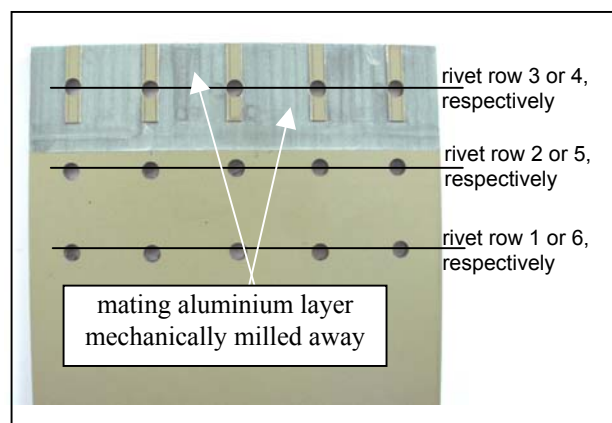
Skin sheet milled in rivet rows 3 and 4 adjacent to location where crack wires are bonded on the strap, specimen 2-B-28
